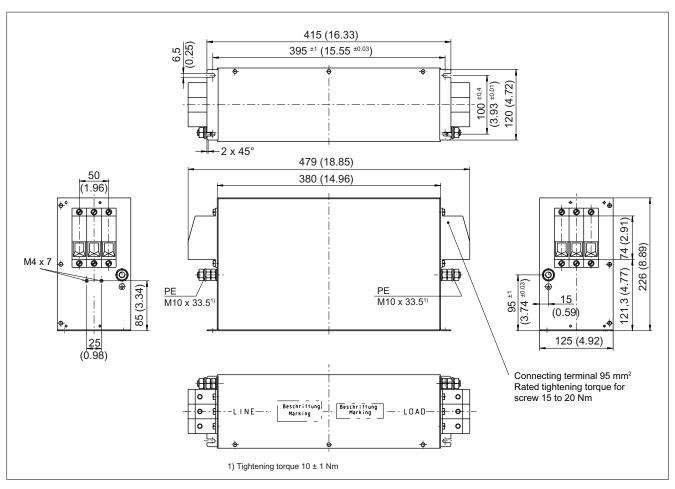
Dimension drawing of Basic Line Filter for Basic Line Modules 100 kW, order number 6SL3000-0BE31-2DAx, all dimensions in mm and (inches)
